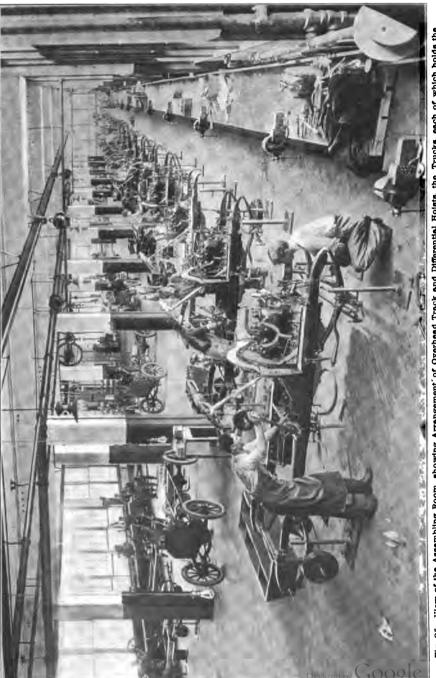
View of the Assembling Room, showing Arrangement'of Overheed Track and Differential Holsta, the Trucks, each of which holds the Parts for Two Cars' and the Adjustable Frame Supports
